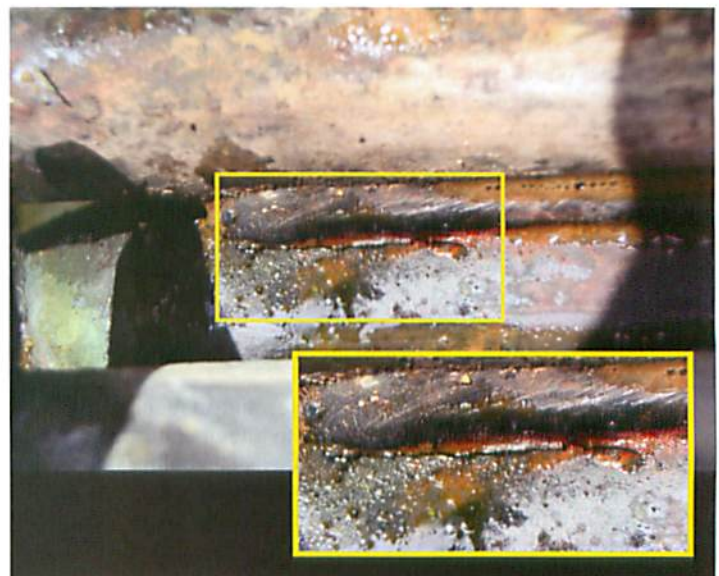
A crack on the edge of the weld between the electric heater and boiler tubes of a Dometic RM2862.
